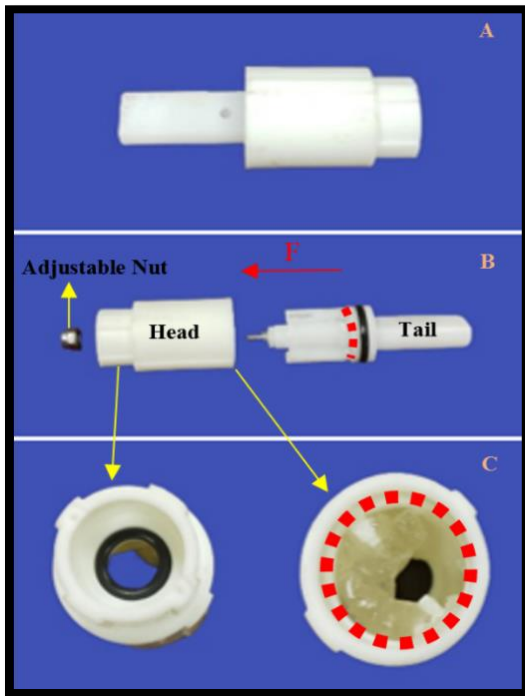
A) TOILET HINGE B) DIFFERENT PARTS OF THE TOILET HINGE C) TOP & BOTTOM VIEW OF THE HEAD OF THE HINGE
